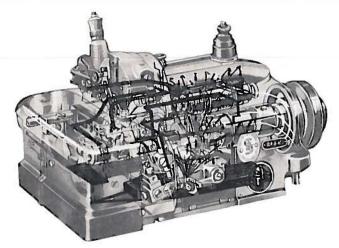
X-ray View of Class 246K Machine (Lubricating System Shown in Solid Black)
